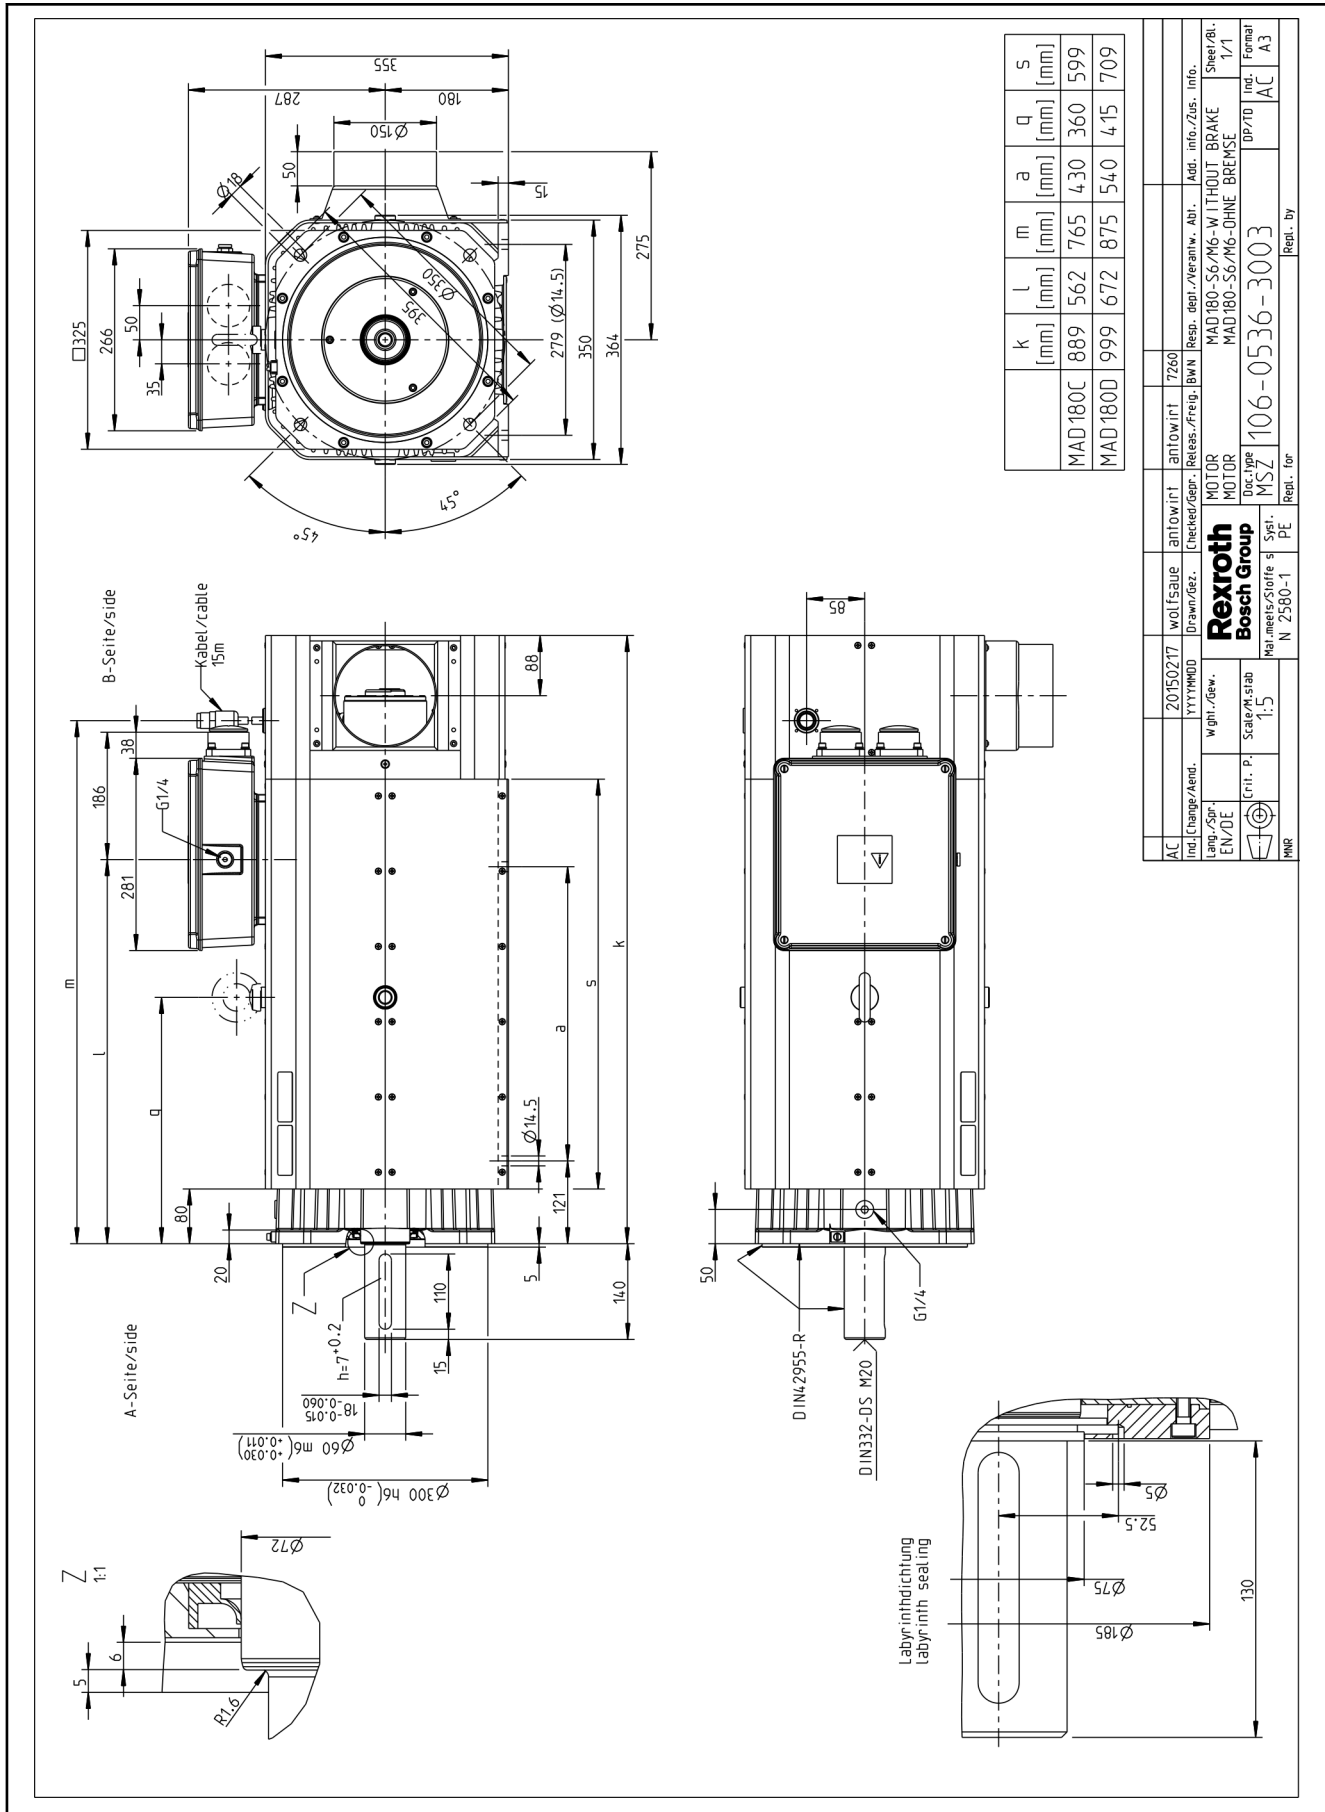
MAD180 with M6/S6 encoder, without brake
